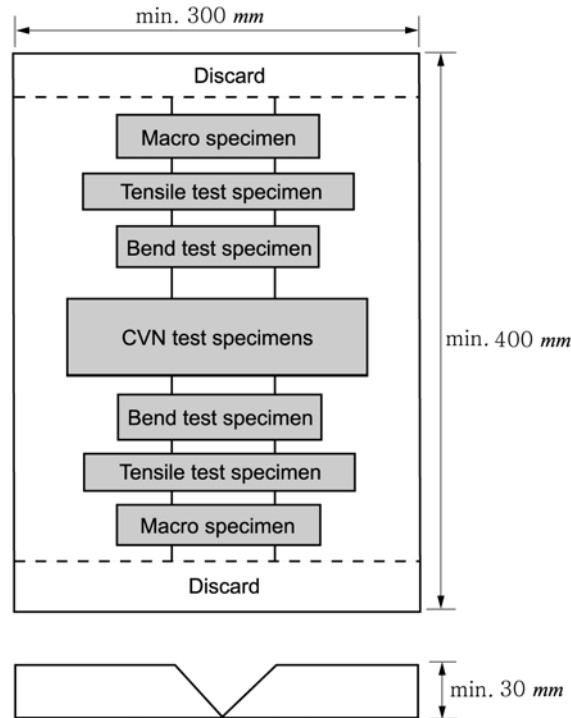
Test Sample for Butt Welding Test
